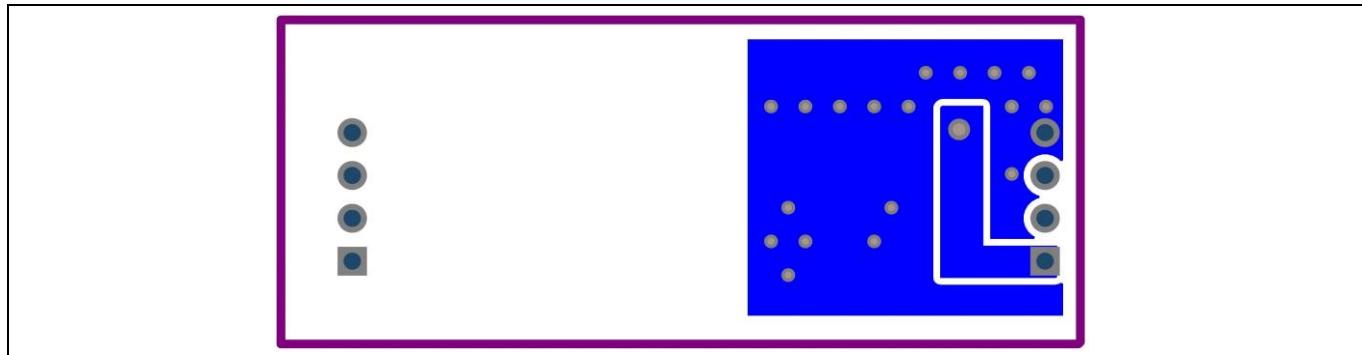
Bottom view of PCB for gate drive optocoupler design with ACNU-3430
